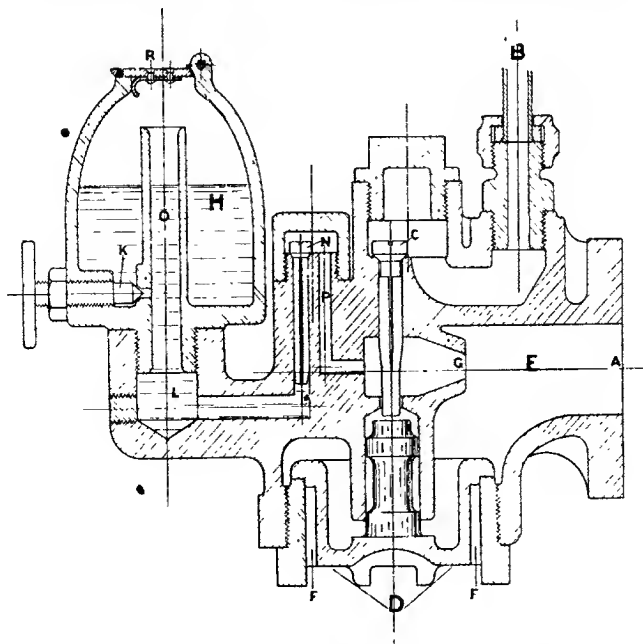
Smith's Automatic Vacuum-destroying Valve Lubricator for Locomotive Engines.
